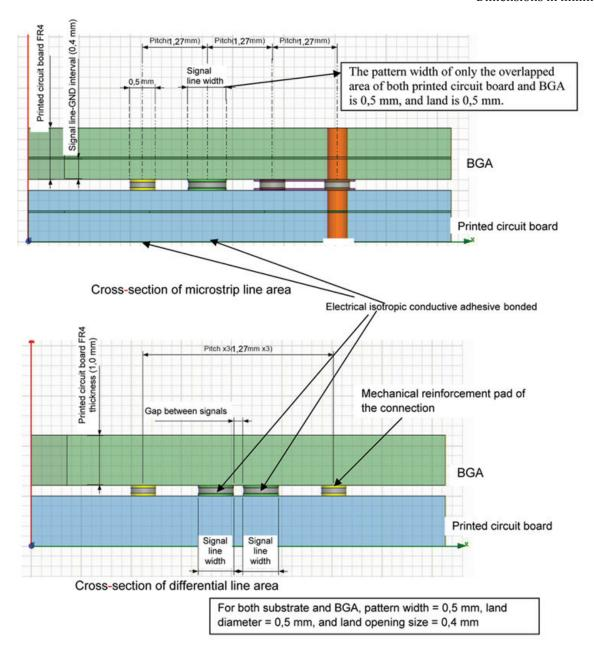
Structure and dimensions of thickness direction after a standard test circuit board for measurement of Z-direction and standard BGA to be connected
